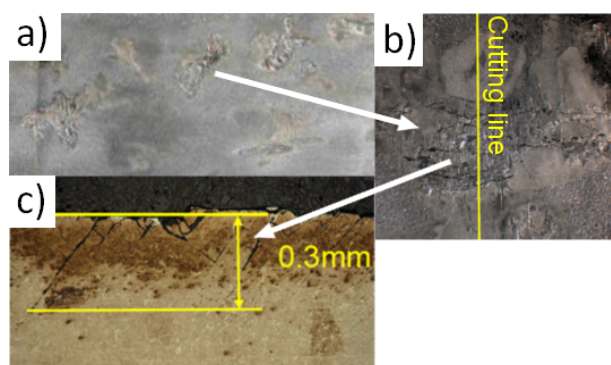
Fretting damage spots in a large contact interface (a), a fretting damage spot (b) and fretting induced cracks (c).
